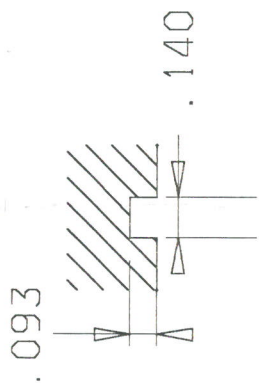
Brass Injector Showing "As Machined" Dimensions
